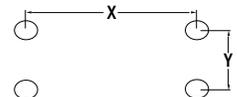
A TUHD BEARING BOLT PATTERN EX.
